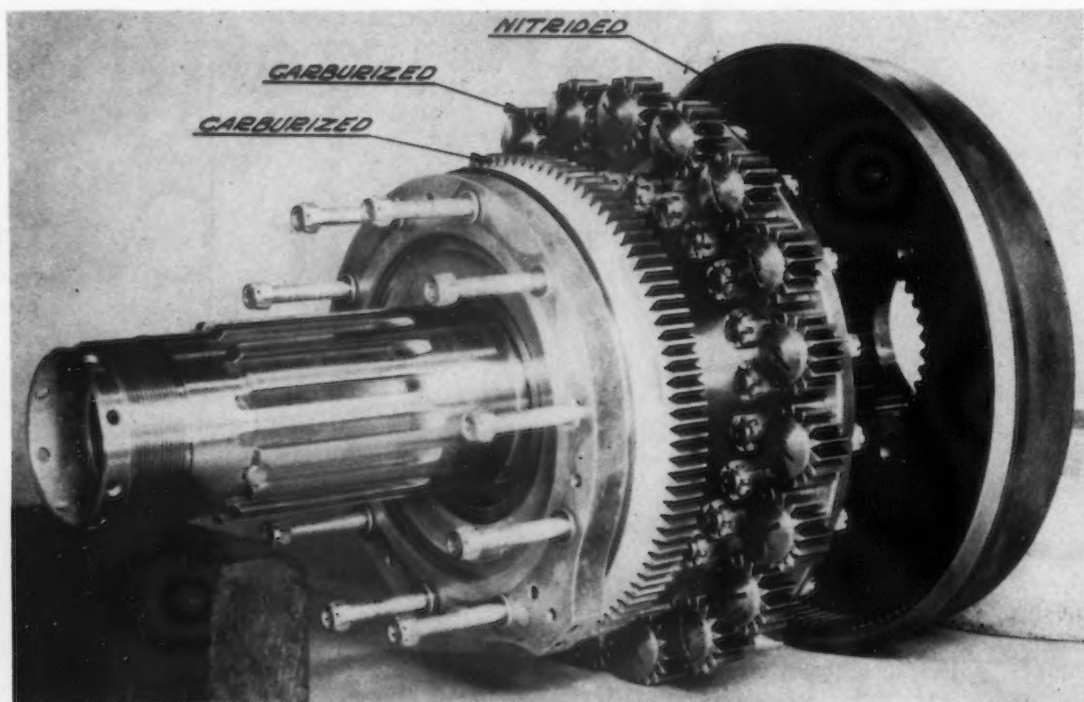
Complete propeller reduction gear for a radial aircraft engine. It is of the planetary type, consisting of a stationary central gear, 20 small pinions carried on the propeller shaft, and a large internal gear surrounding the pinions. The large internal gear is driven at crankshaft speed and the pinion carrying frame on the propeller shaft at 9/16 of engine speed. The 20 pinions on the propeller shaft have 15 teeth each of 10.4 diametral pitch, 23
